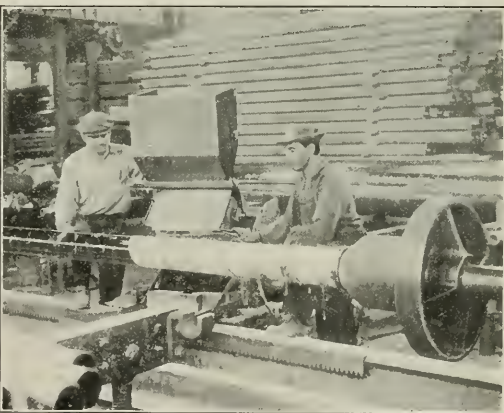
MACHINE FOR WRAPPING PIPE SPIRALLY WITH FABRIC AFTER APPLICATION OF HOT BITUMINOUS COATING
